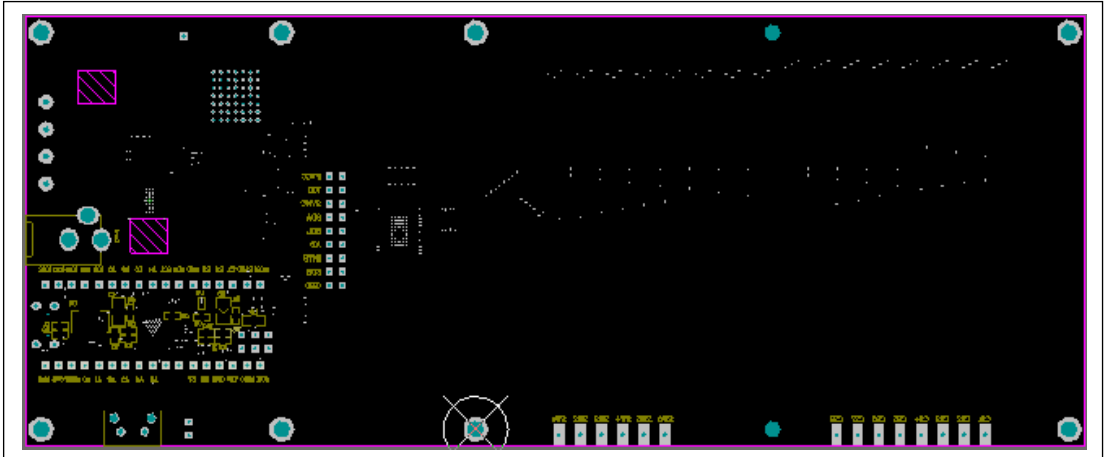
Board Component Placement Guide - Bottom Layer: V01A
